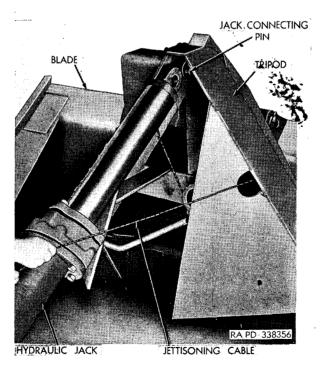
Connecting hydraulic jack to tripod—bulldozer M1.
